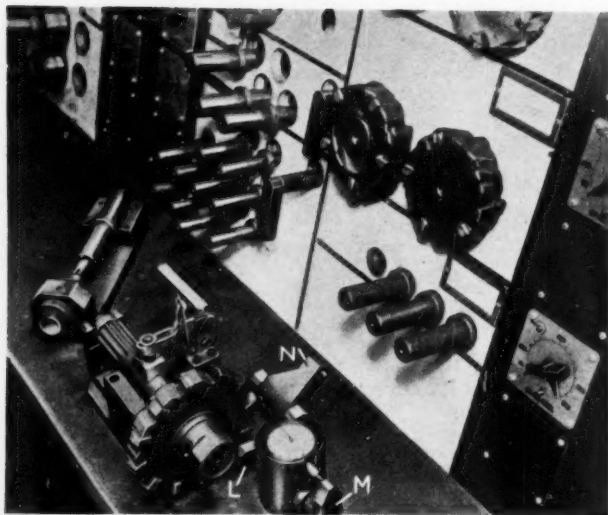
Close-up View of One of the Four "Royal" Tool Control Boards, Showing the Dials on which Successive Machine Cycles are Registered and One of the Fixtures Whereby a Milling Cutter can be Pre-set After Sharpening
